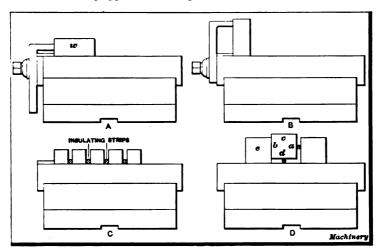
End Views illustrating Different Methods of holding Work on Magnetic Chuck
